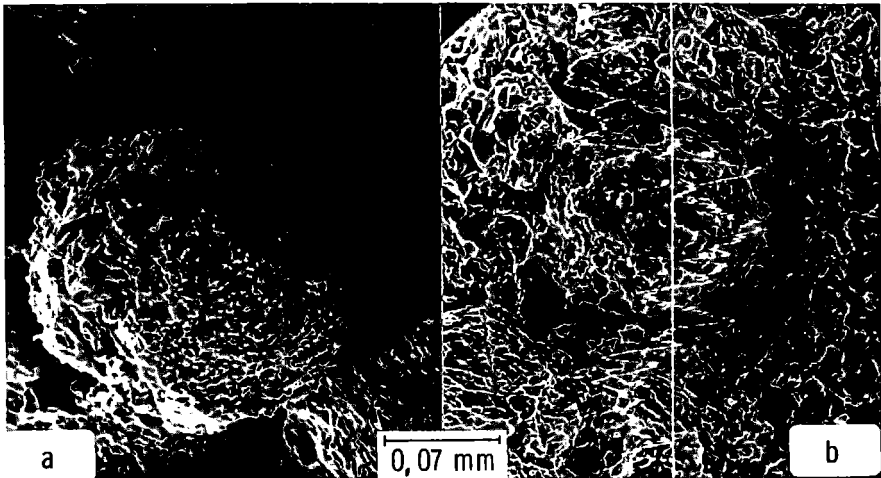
Spherical Inclusions in the Fatigue Fracture Surface
